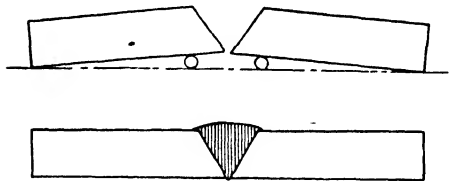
PLATES SET UP OUT OF LINE FOR WELDING
